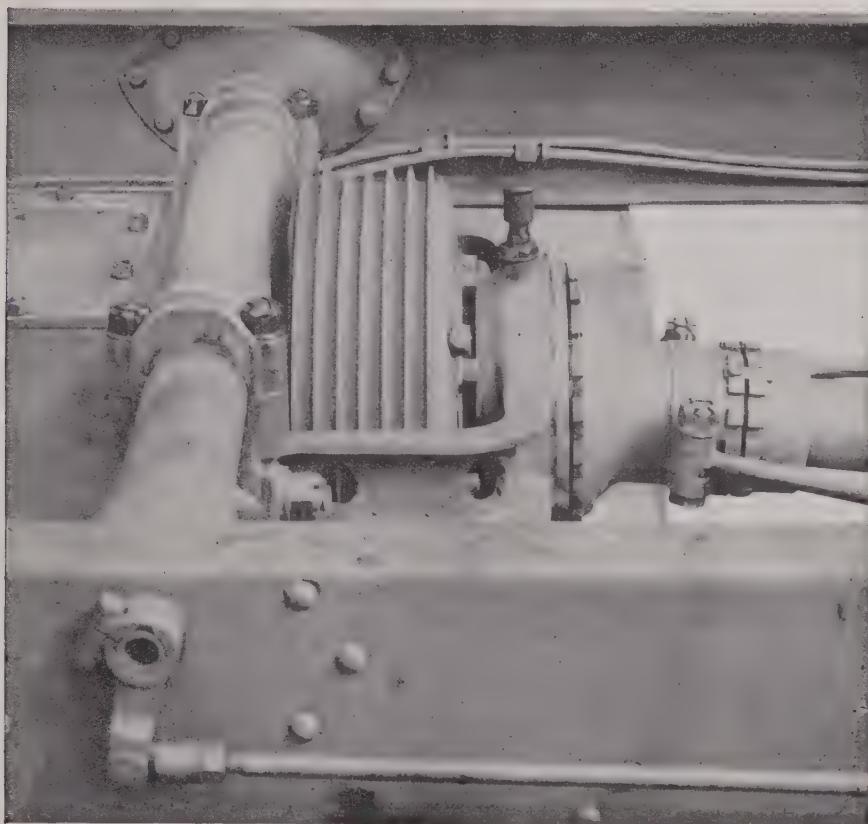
Crossley Propeller Shaft Brake Drum.
